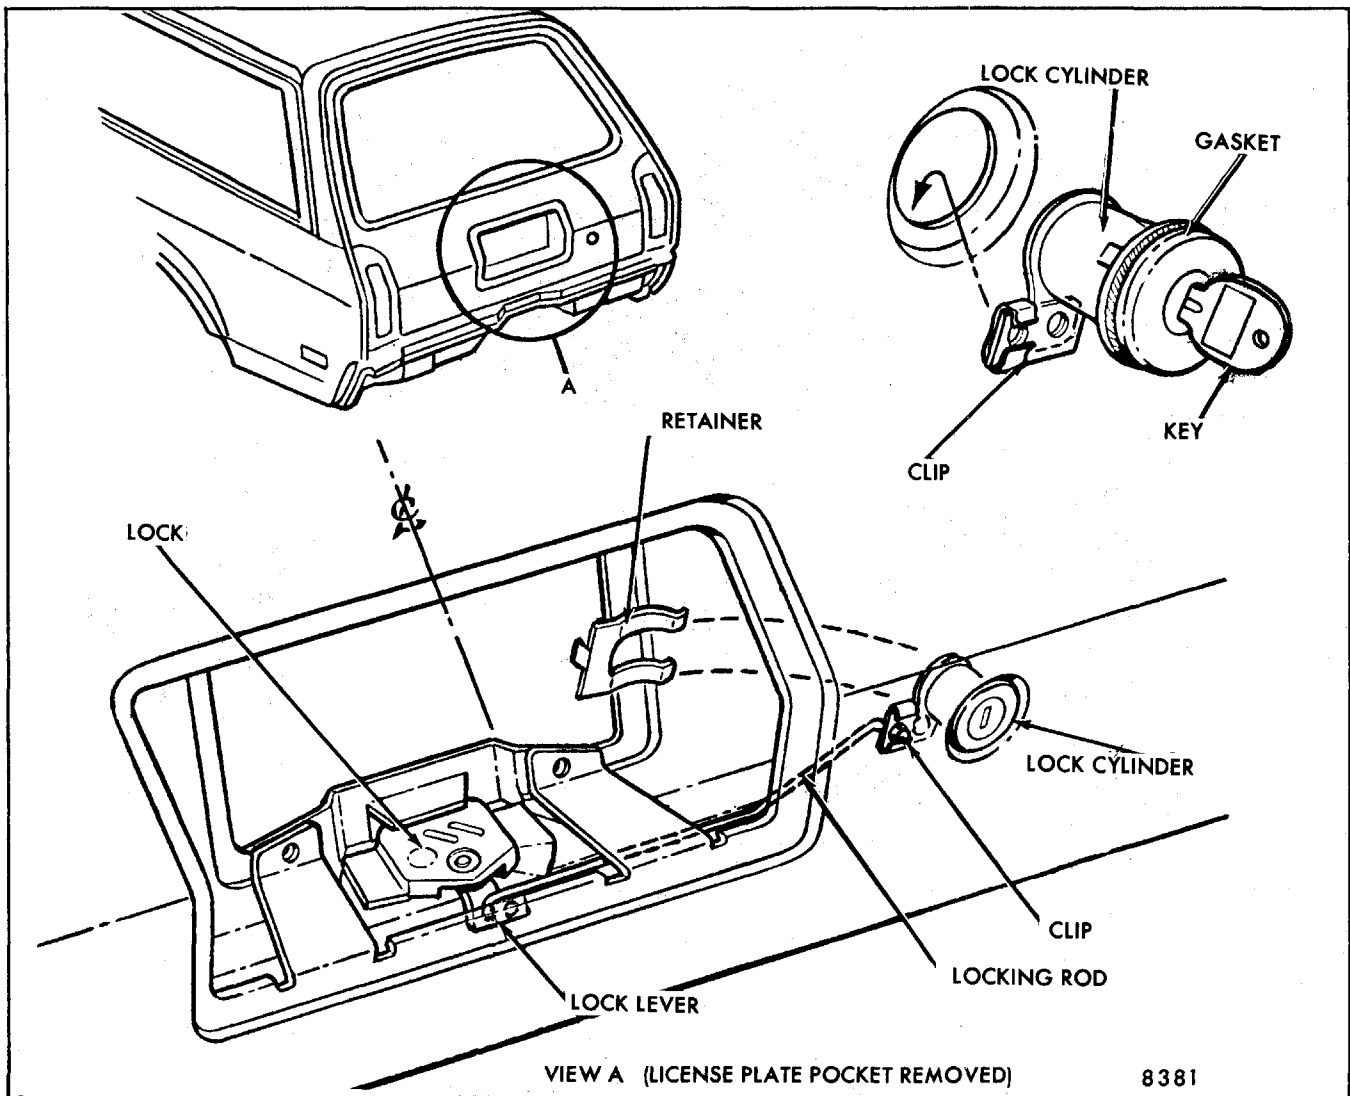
Lock Cylinder Installation - "H-15" Styles
